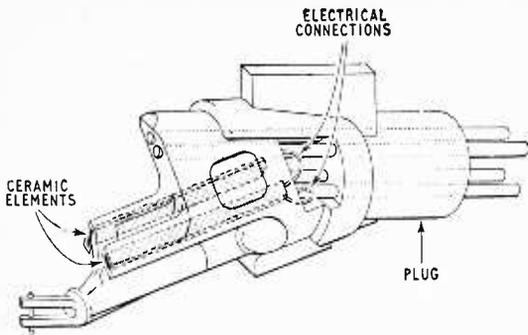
Schematic side view of new stereo pickup with cover removed.
